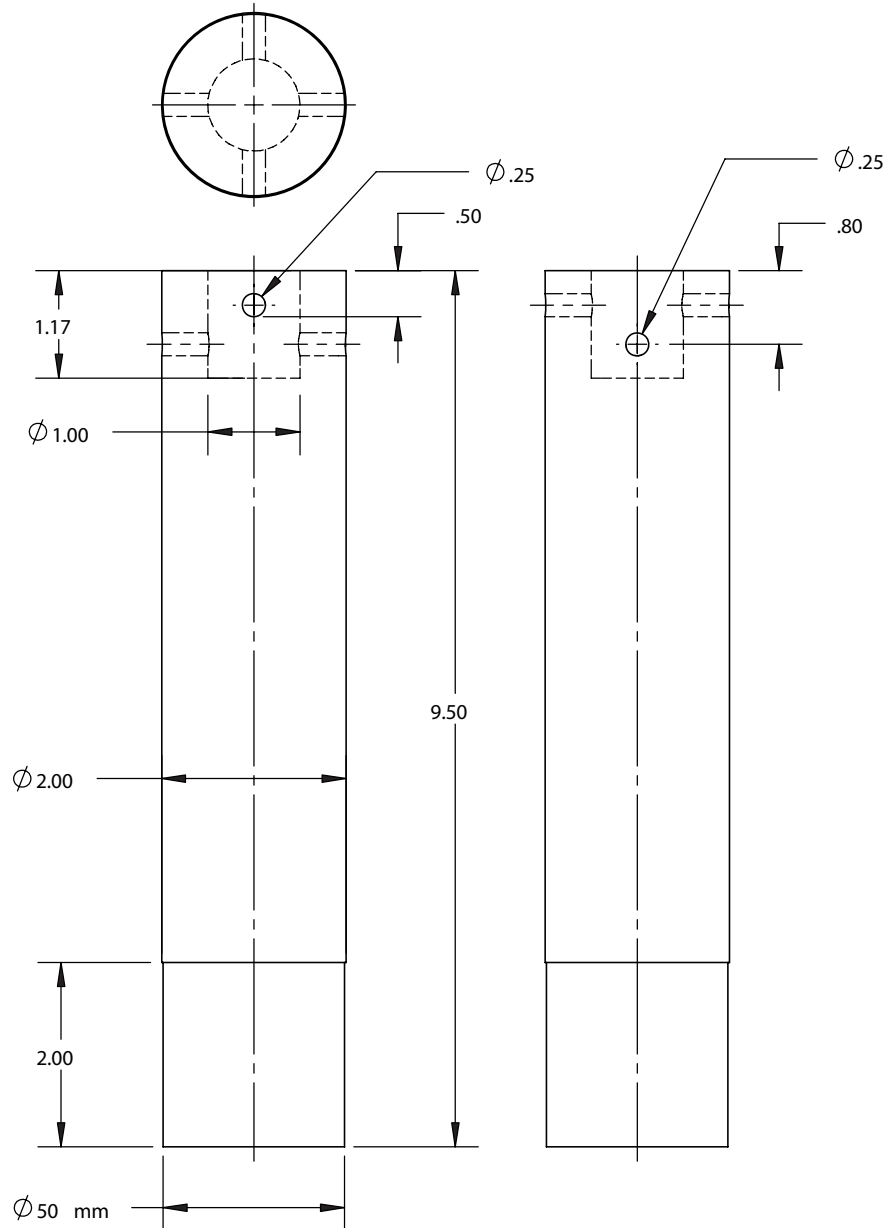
Drawing of the second generation bottom platen connector used to connect the load train to the Instron grip. Dimensions in inches unless otherwise noted.
